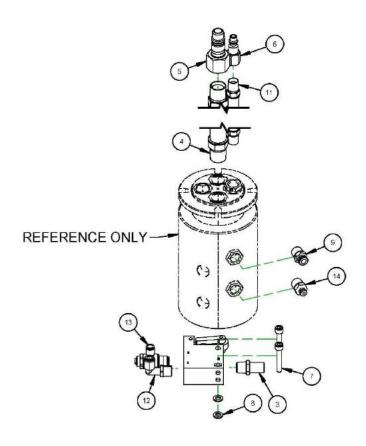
FEED BOX ASSEMBLY (P/N 58671)
